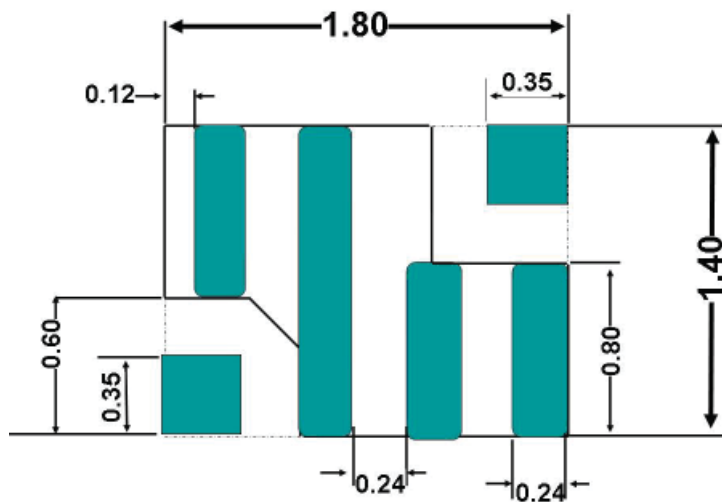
ACPF-7024 Superposed on PCB Layout (top view)
